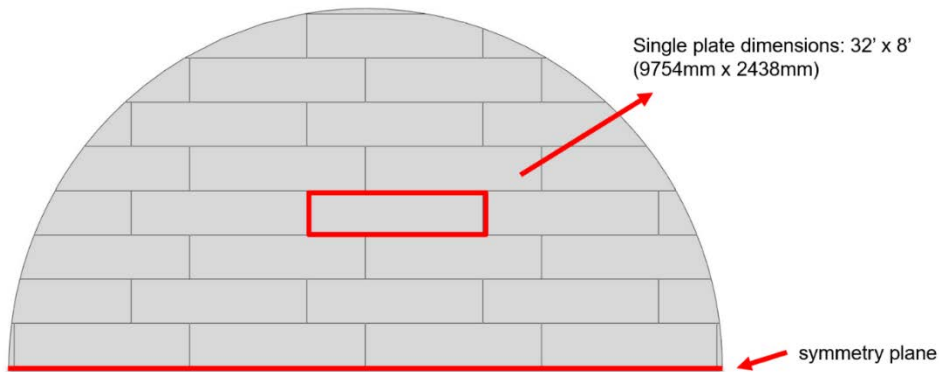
Layout of the hot tank floor used in the tank floor fabrication model
